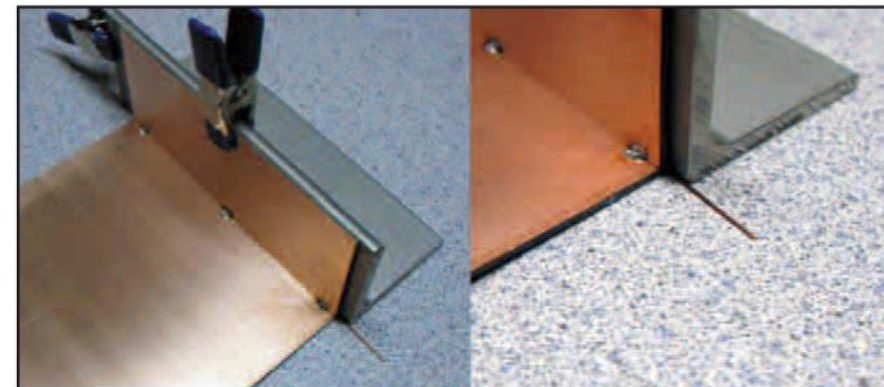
Photo D. Since solder contracts as it cools, you'll want to set your corners at 92°, using a piece of 20 awg wire to make that slight bend.
